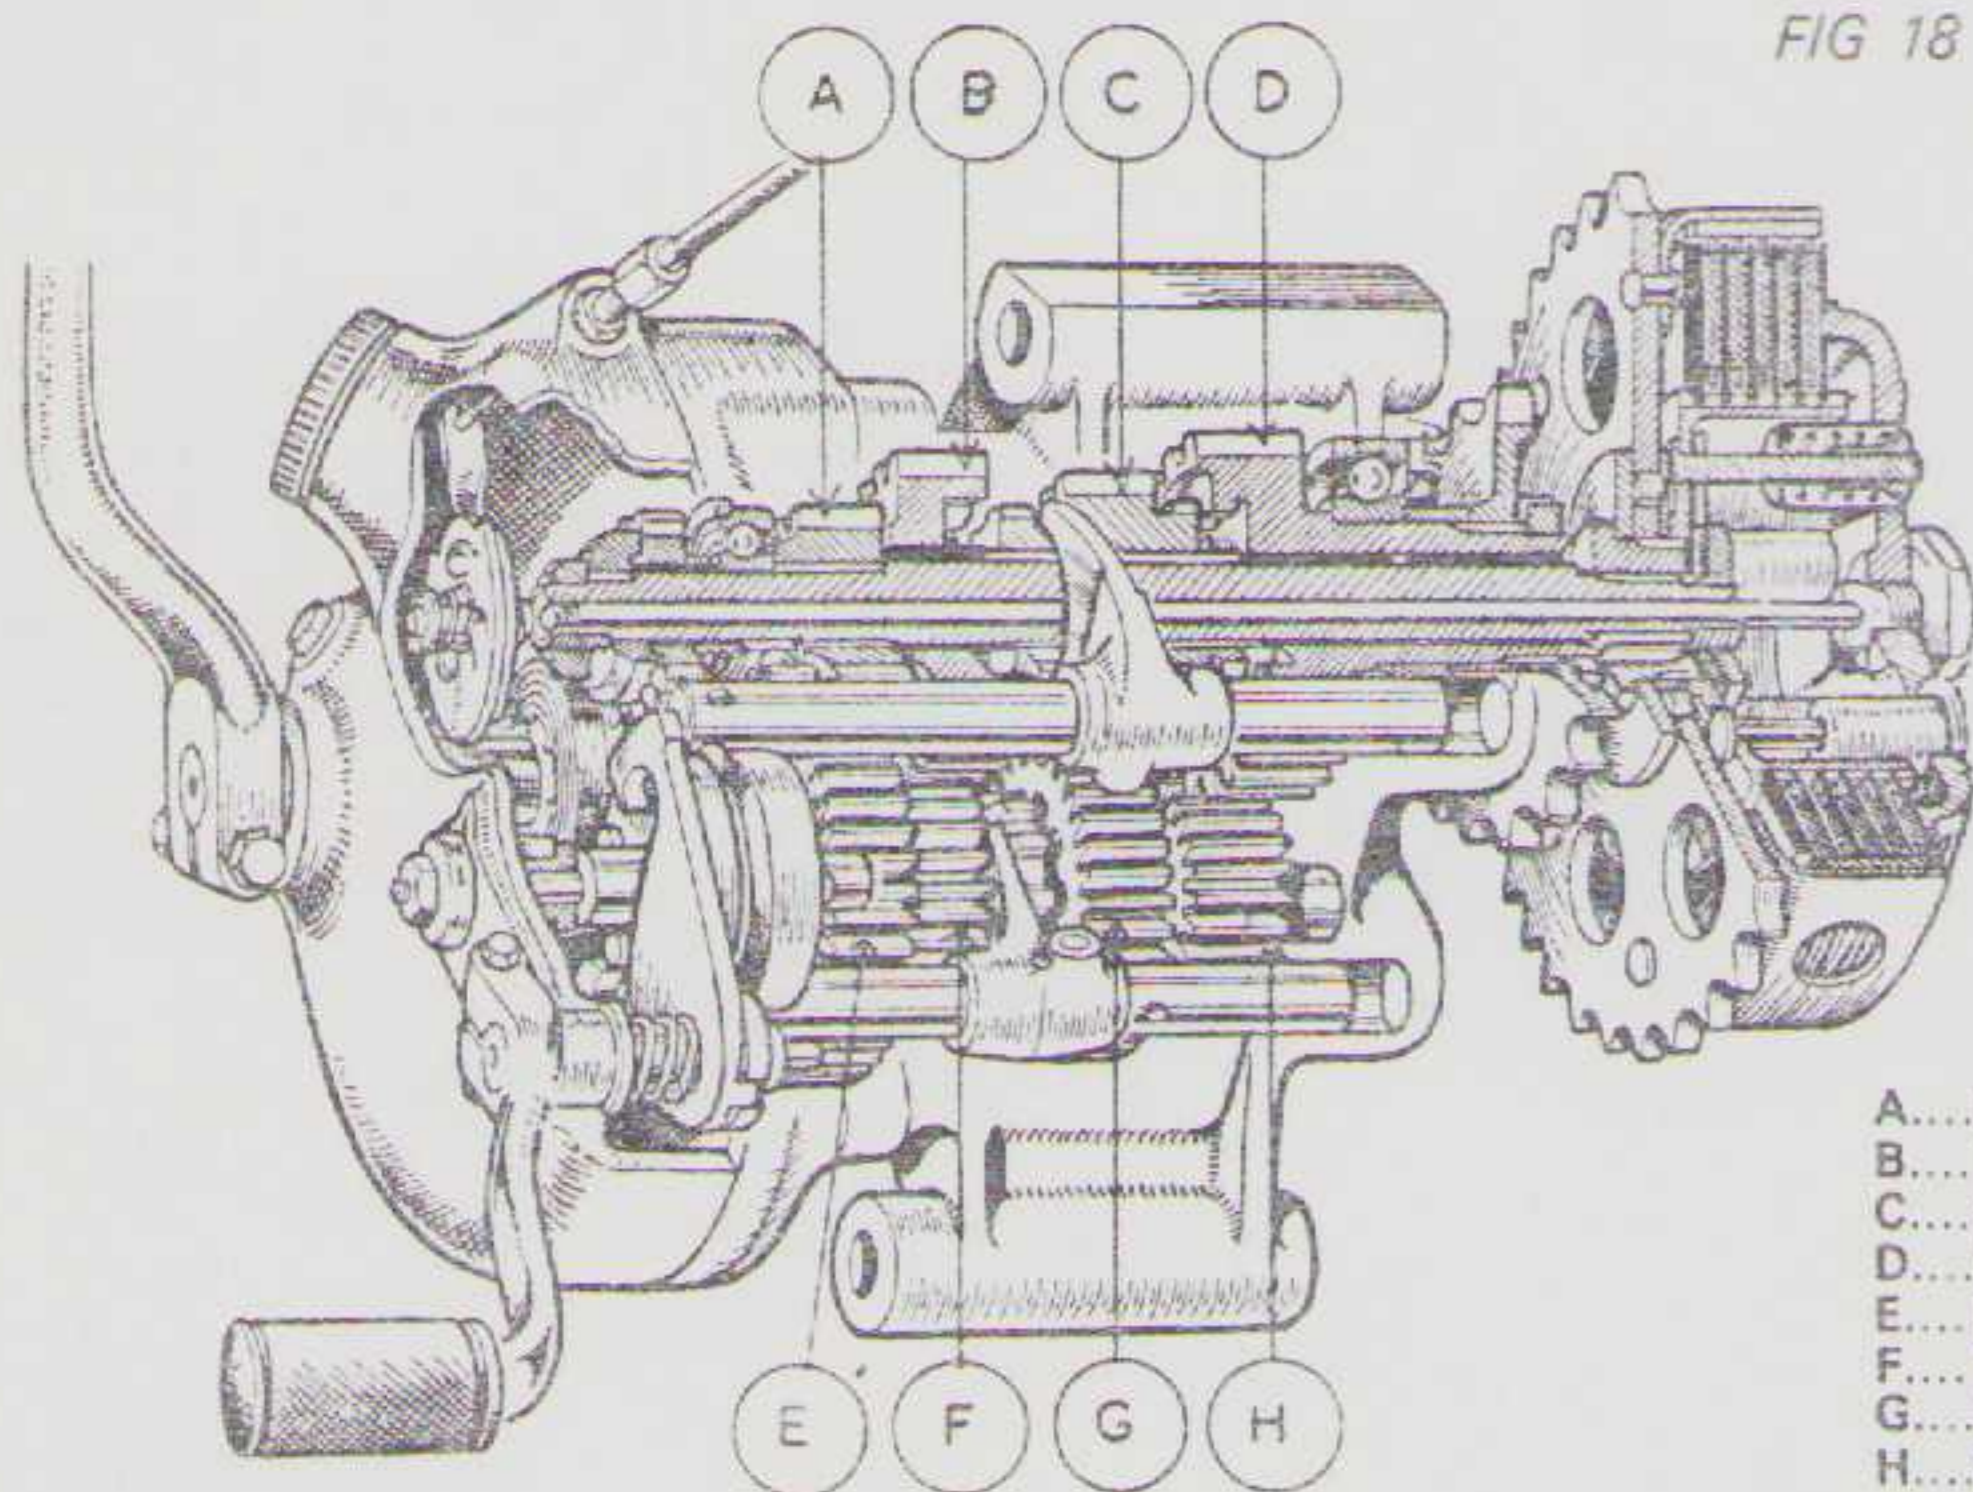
Section through the Burman B52 gearbox showing gears and clutch with actuating mechanism
